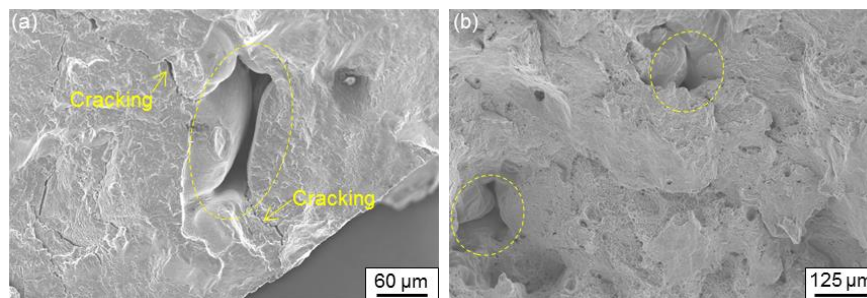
(a, b) Complex manufacturing defects on the cast MarBN fracture surface.
